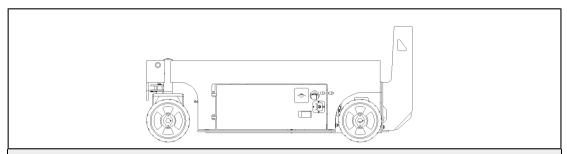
Pothole protection system-Complete declination of work platform-The pit fence is elevated.
